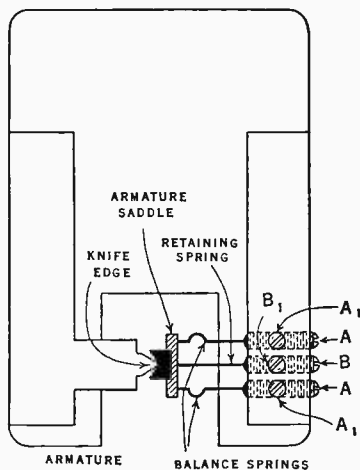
Rear View of the New Cutter Showing Armature Mounting.
